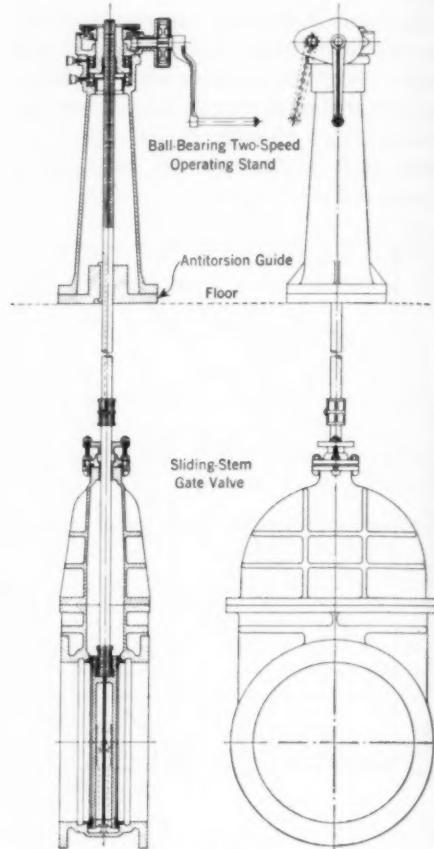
Sliding-Stem Valve With Rising Extension Stem
